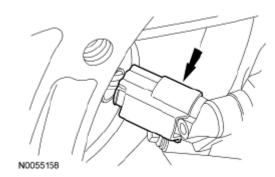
Locating A/C Compressor Electrical Connector Courtesy of FORD MOTOR CO.
